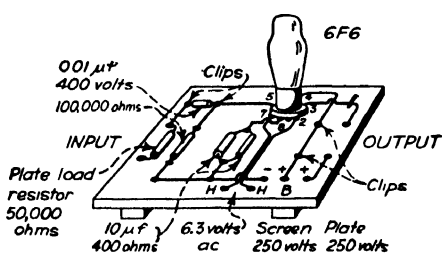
This is the board layout for the power audio amplifier using a pentode tube.
